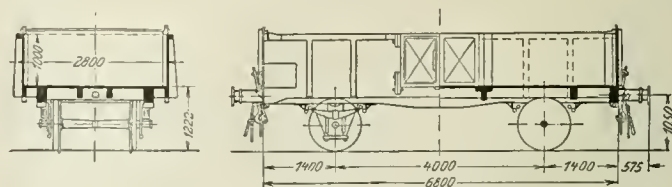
SKETCH OF A 15-TON REINFORCED-CONCRETE CAR
